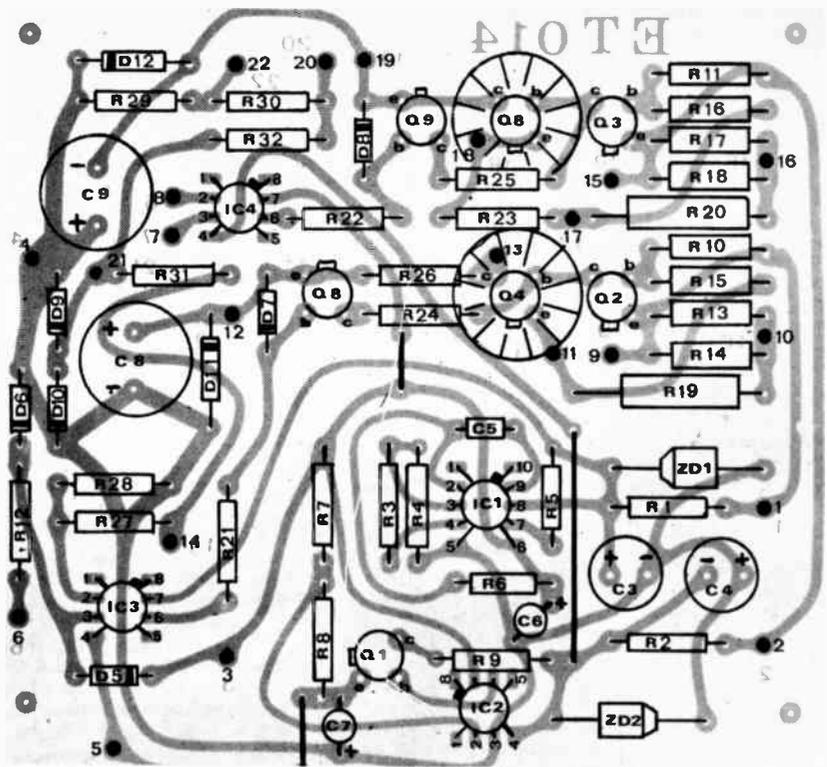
How the components are mounted on the printed circuit board. Compare this with Fig. 3.
